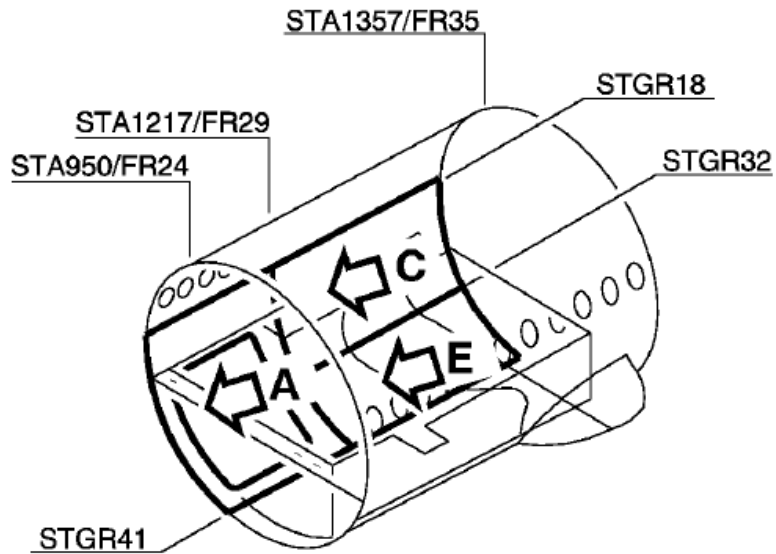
Skin Plates between Frame 29 – 35 & Stringer 32 Right Hand Side – 41 Right Hand Side
